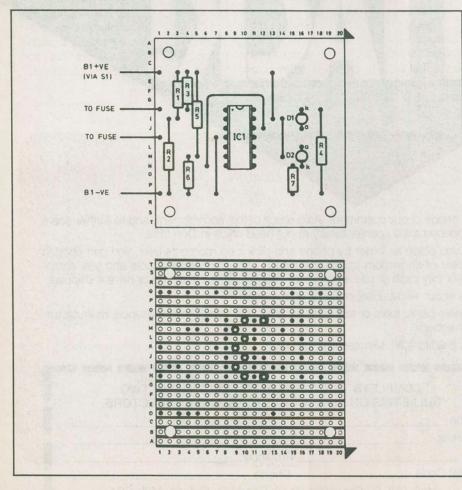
Stripboard components layout and details of the breaks required in the underside copper tracks.
